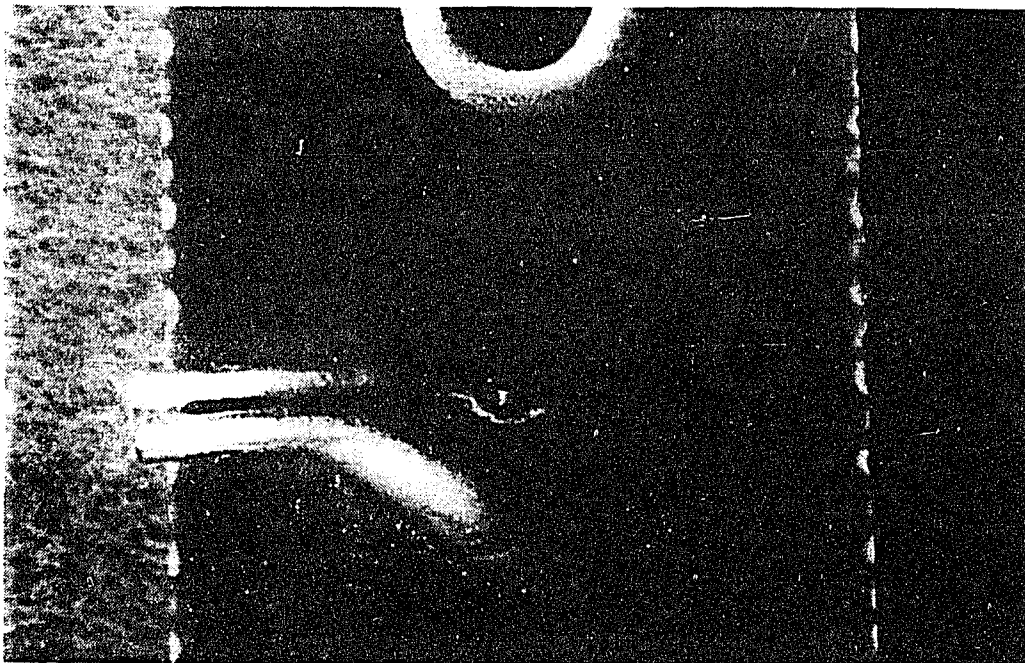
Photograph of an excessive solder joint at 10X magnification.
